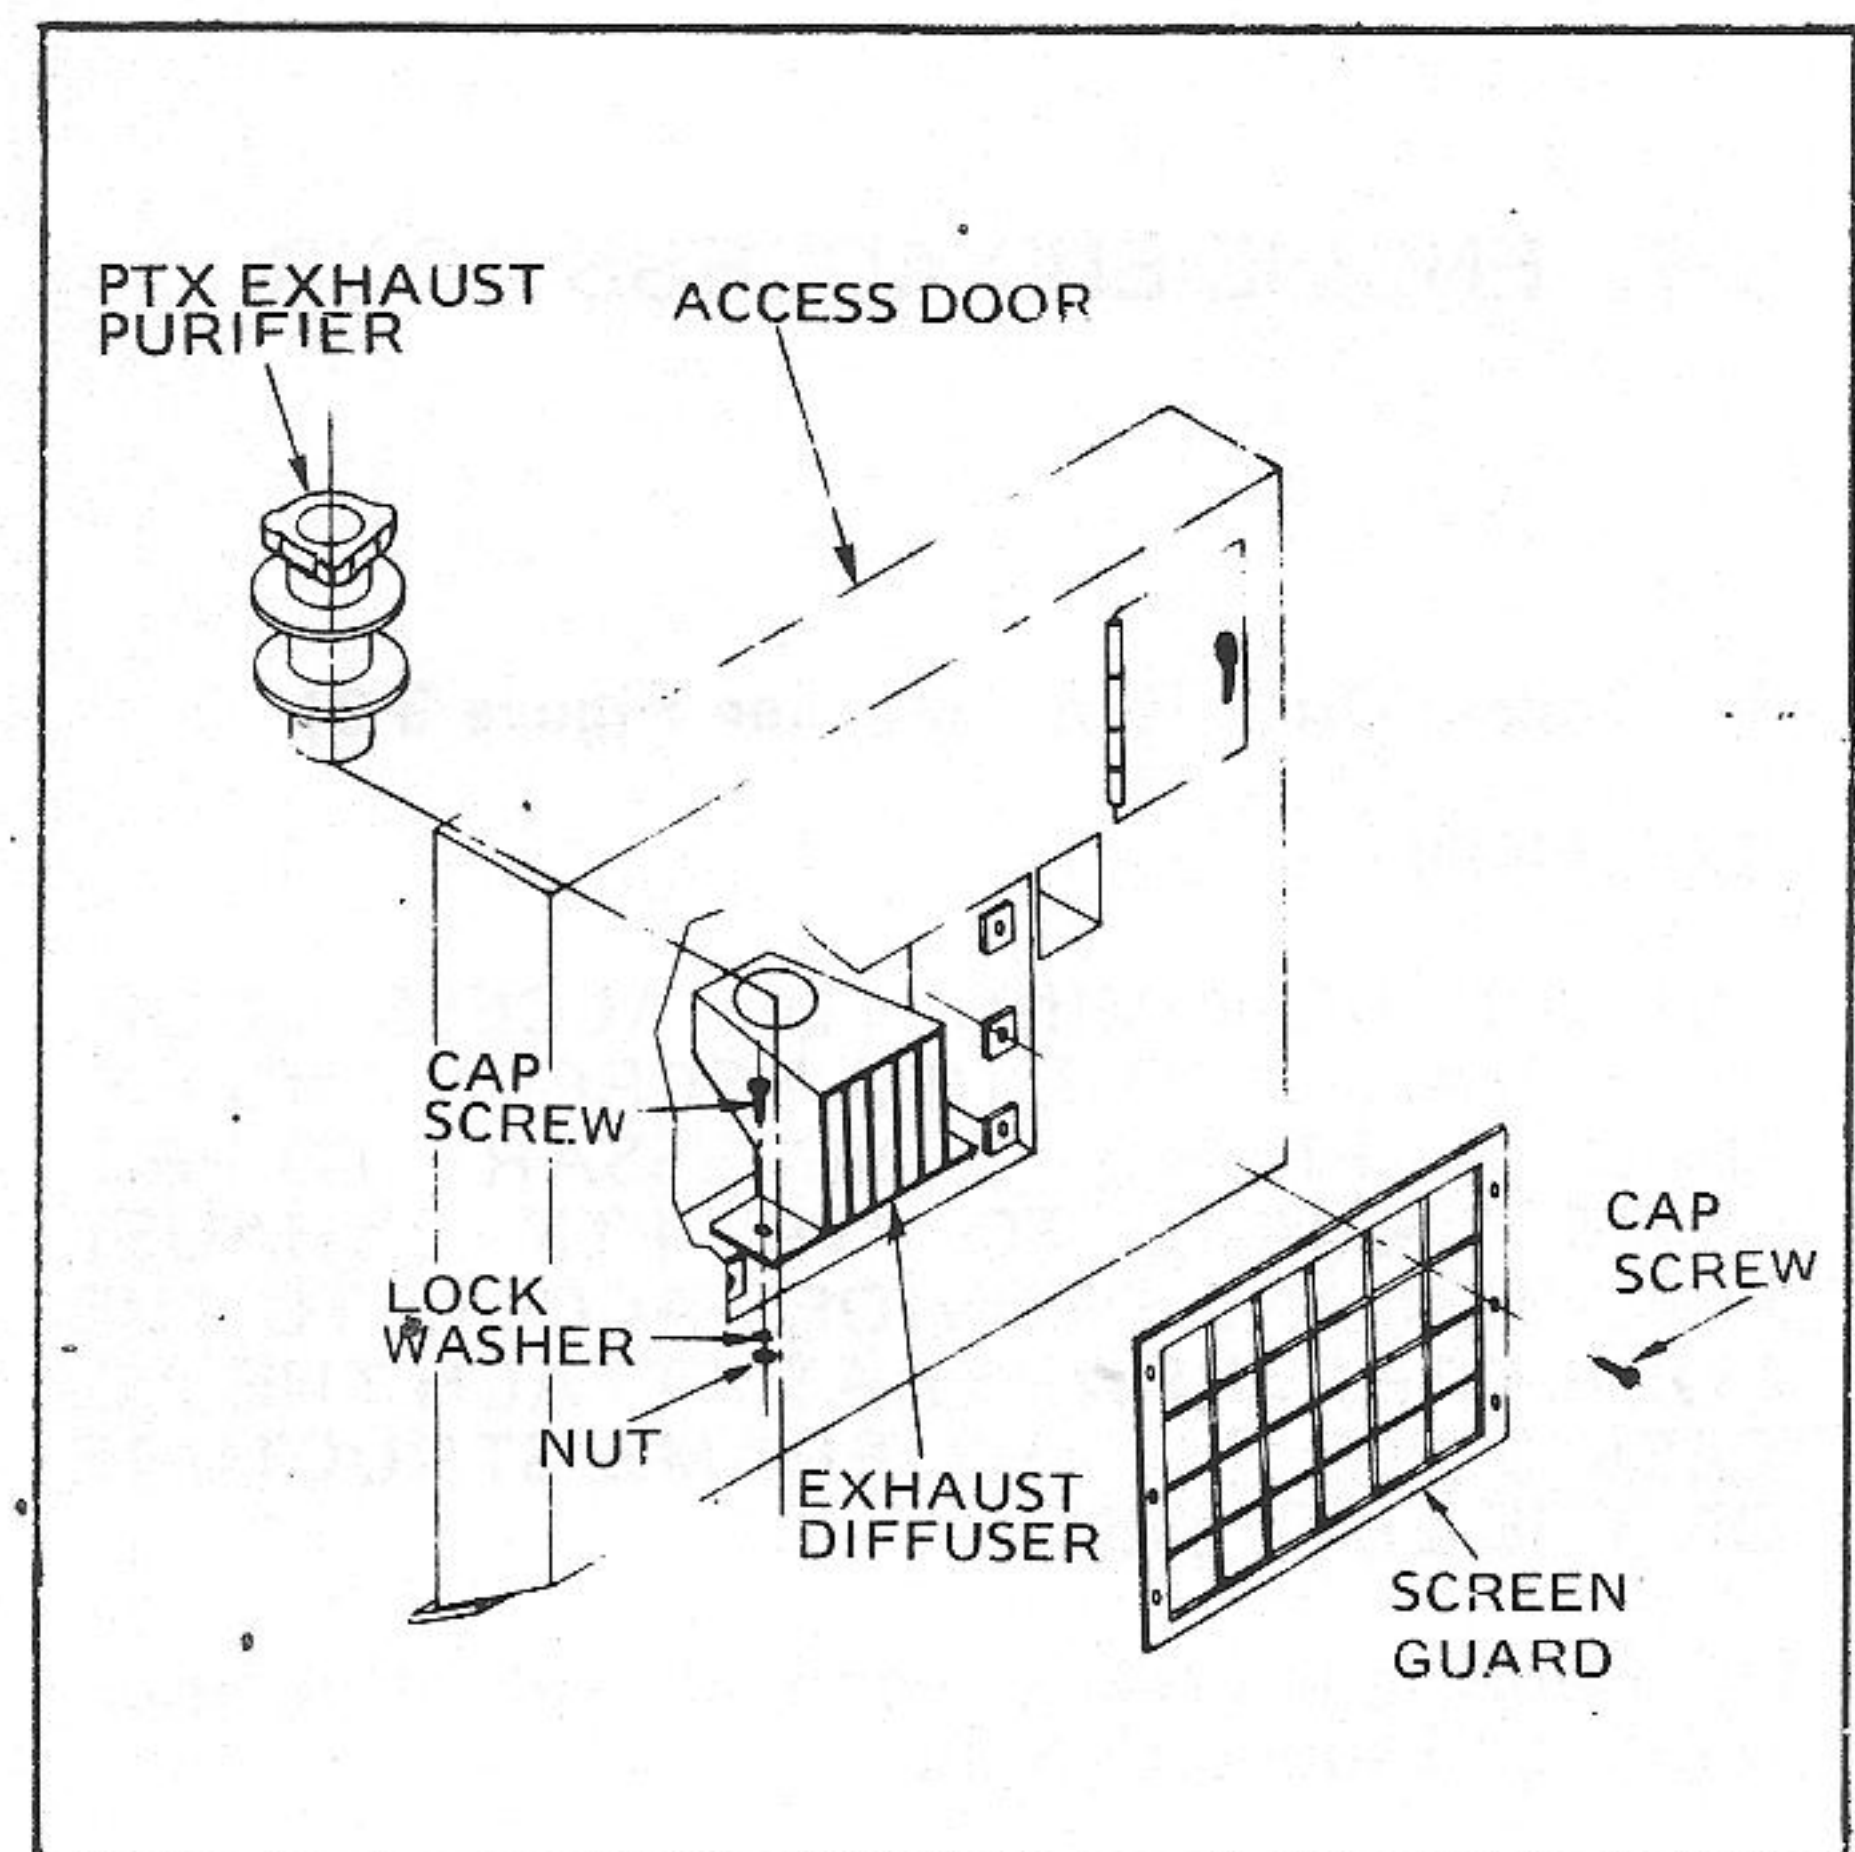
1. PTX EXHAUST PURIFIER INSTALLATION
